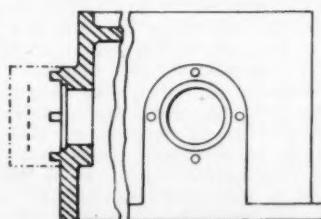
It is unnecessary to deburr the cored hole before assembly if the mating rivet is recessed at the base
